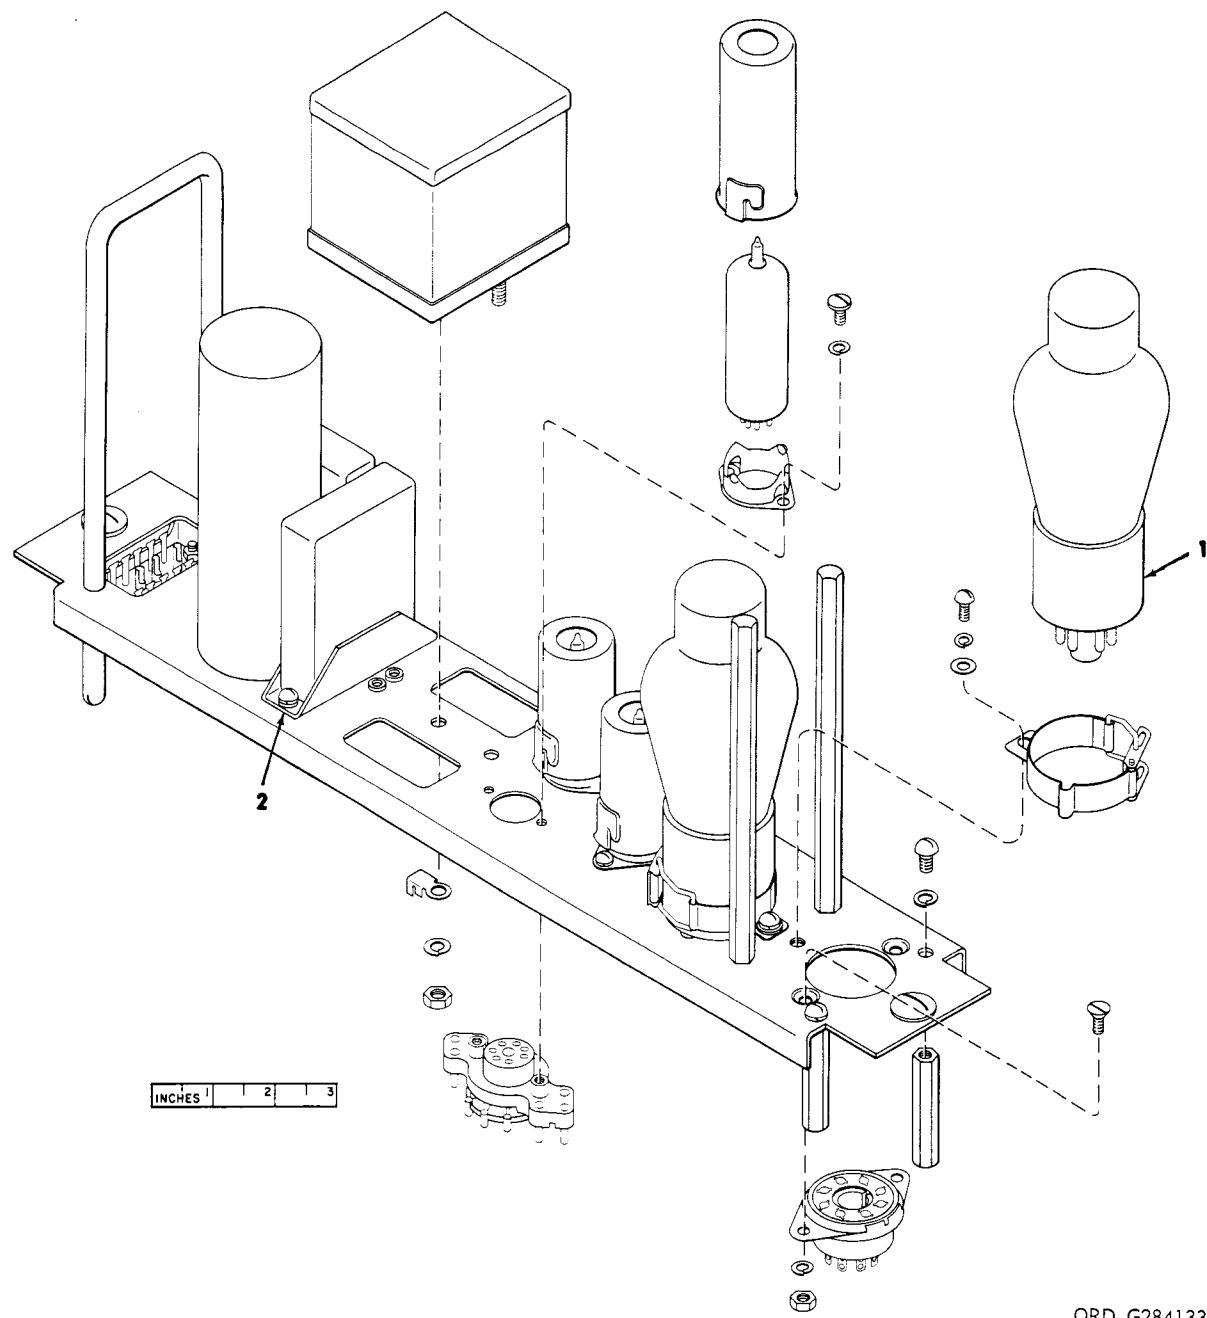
Regulator, voltage CN-280/M (9137641)—partial exploded view
